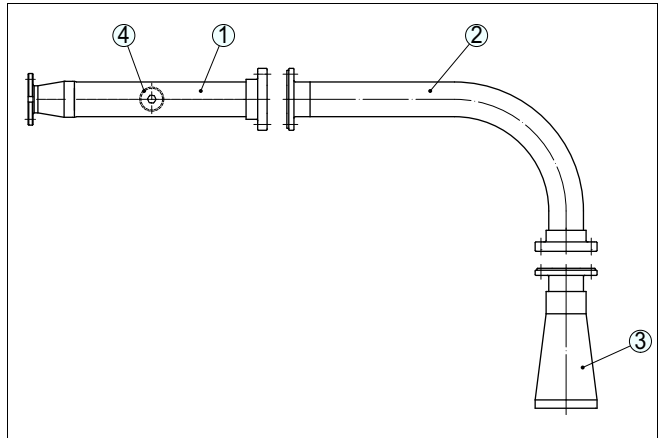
Extension multi-sectional, upper section straight, middle section angled, unassembled horn antenna
